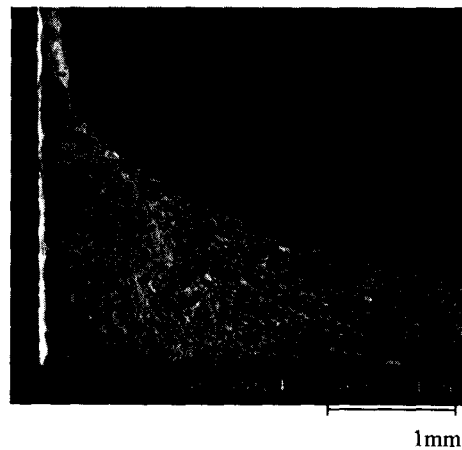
SEM Photographs of Fracture Surface for Shot-peening
